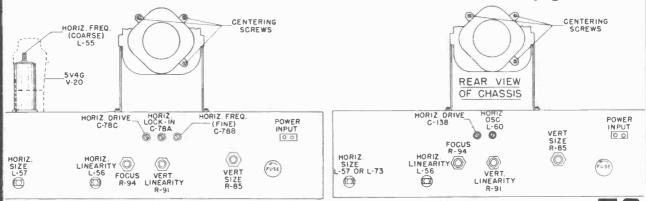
CHASSIS TS-15 & TS-15A SERVICE ADJUSTMENT CONTROL LOCATIONS FIGURE 4 - CHASSIS TS-15B, C & C1 SERVICE ADJUSTMENT CONTROL LOCATIONS 73
